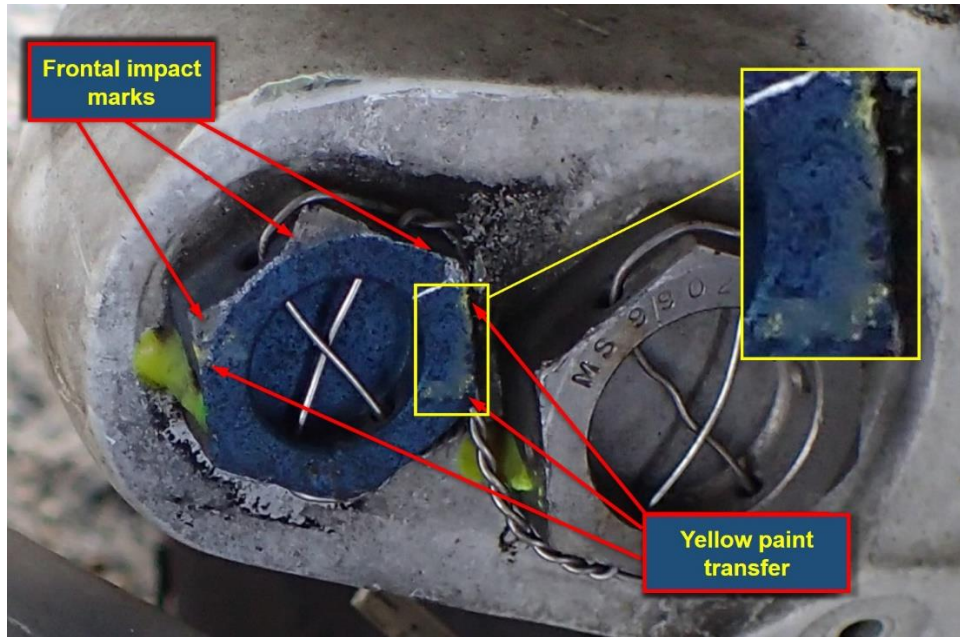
Frontal impact marks on the oil filling plug and paint transfer from the light fixture.
